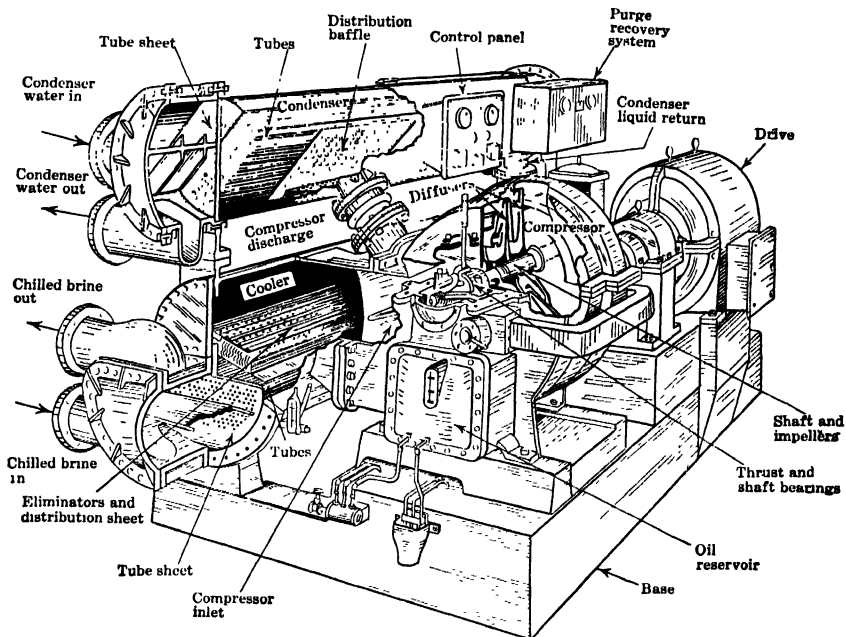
Phantom view of centrifugal refrigerating machine. (Courtesy of Carrier Corporation)
